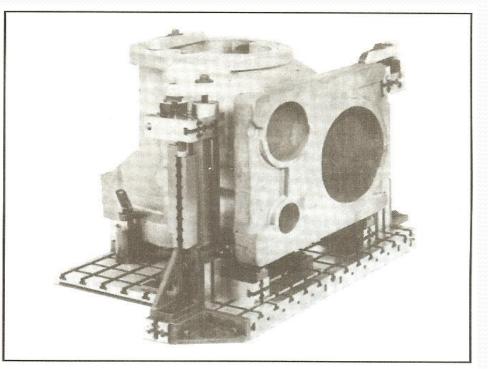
Erector-set fixture with a workpiece in place. (Courtesy Flexible Fixturing Systems, Inc./Erwin Halder, Ltd.)
